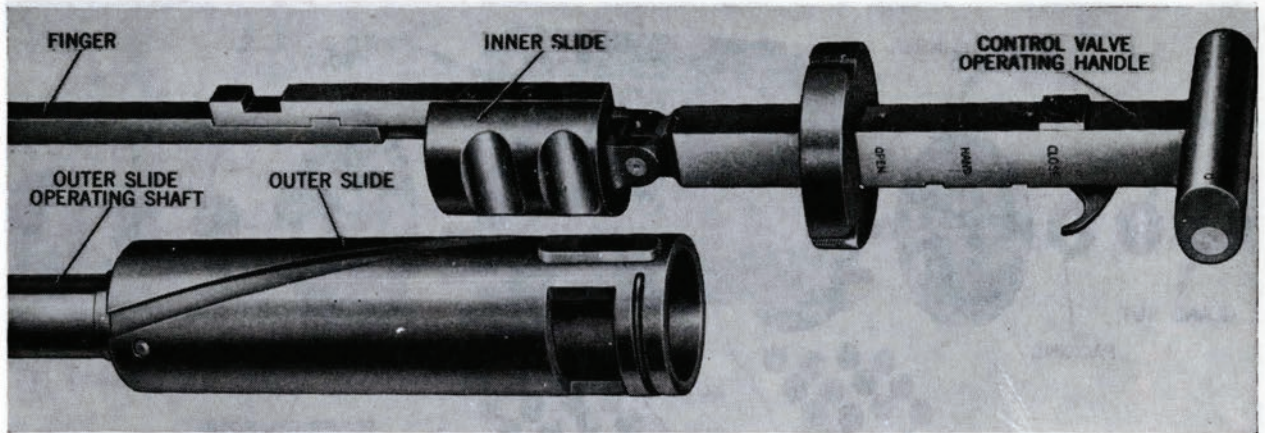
Power-Operated Muzzle Door Mechanism—Breech End Parts of Operating Assembly.
